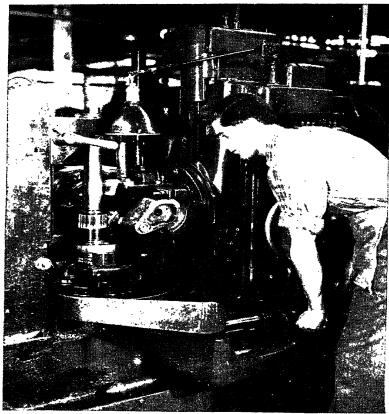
Cutting the splines for a reduction driving gear on a Wright 14cylinder-engine crankshaft.
